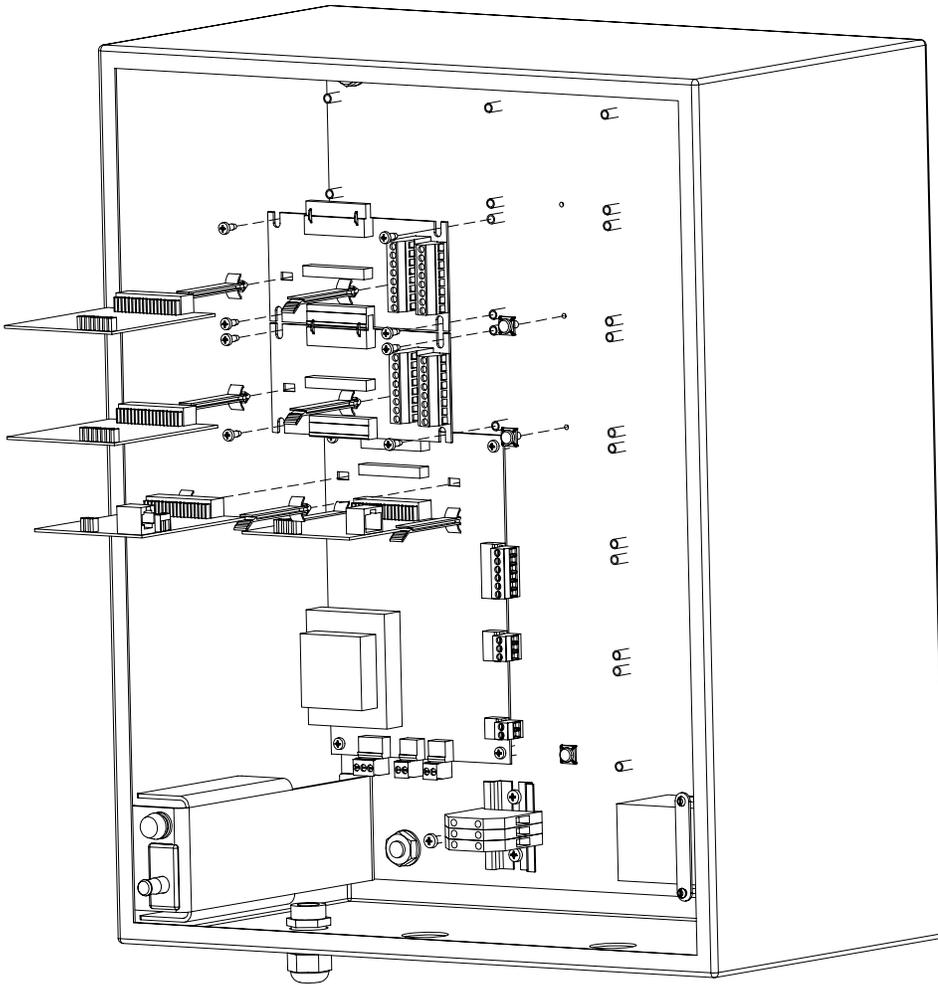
FTM 5009 Assembly Showing Optional Add-on Cards
